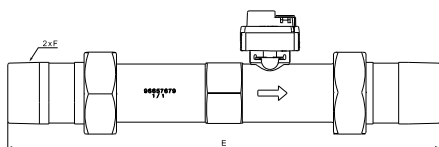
Dimensions, VFS 20-400 l/min, with adapters
